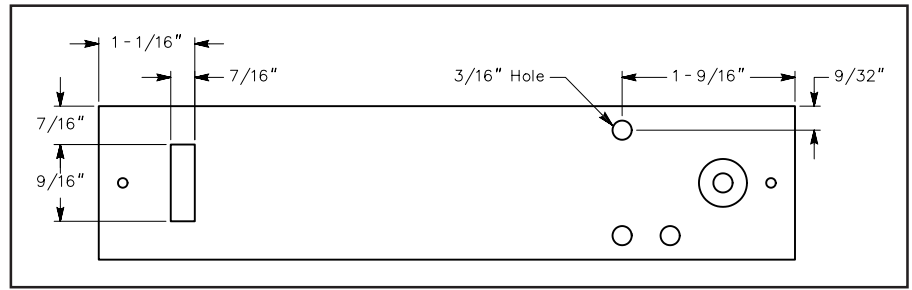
Dimensions for mounting the thumbwheel switch and LED to the front panel of the MFJ data radio.
